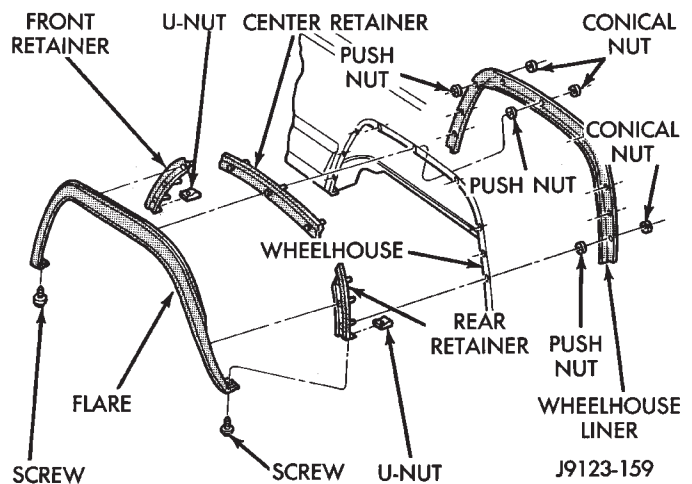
Rear Wheelhouse Flare, Retainers and Liner
